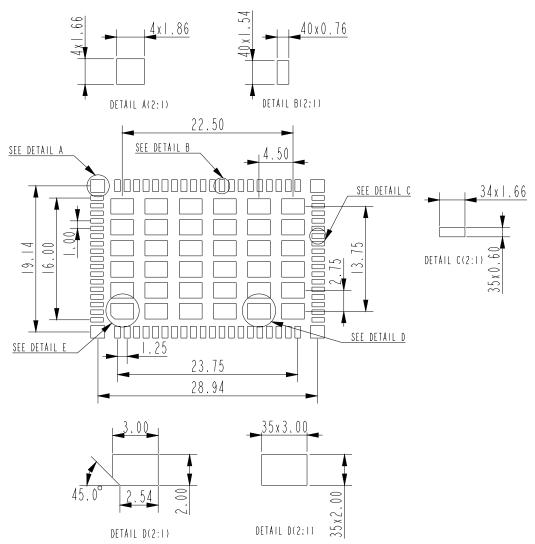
PCB pad design (Top View) (Unit: mm)
